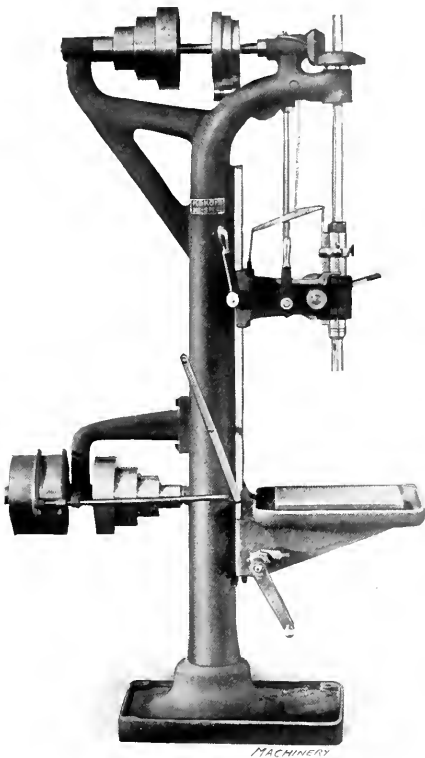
Kokomo "Hi-speed" Drill equipped with Power Feed
